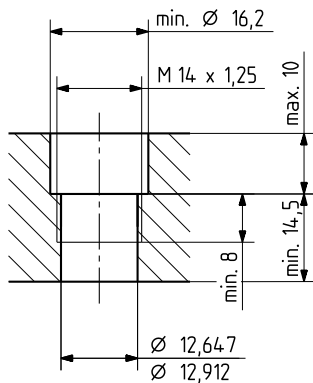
Mounting bore for Type 4043A.../4045A...
